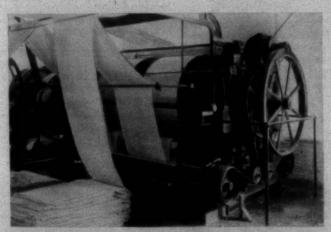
A Ball Bearing Napper Machine, Motor Driven.
